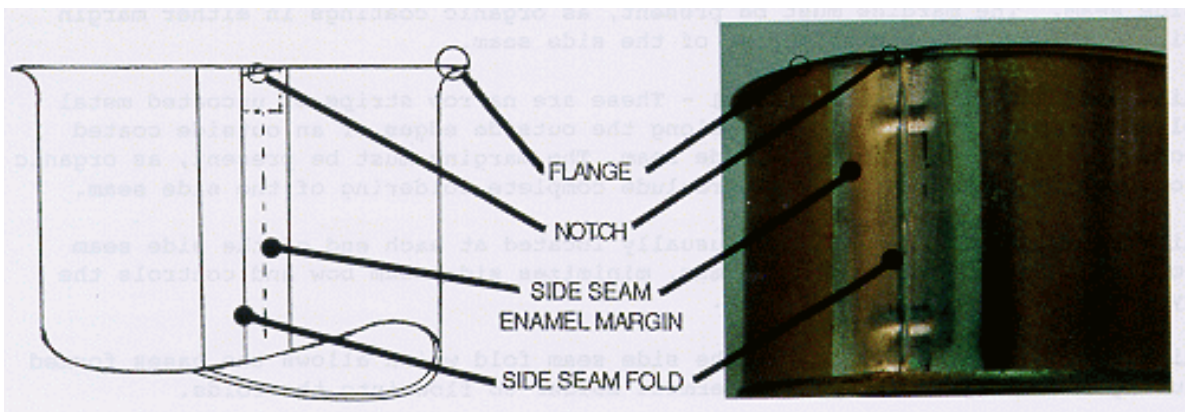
b - Three Piece Can - Soldered Side Seam - Open Top Can
